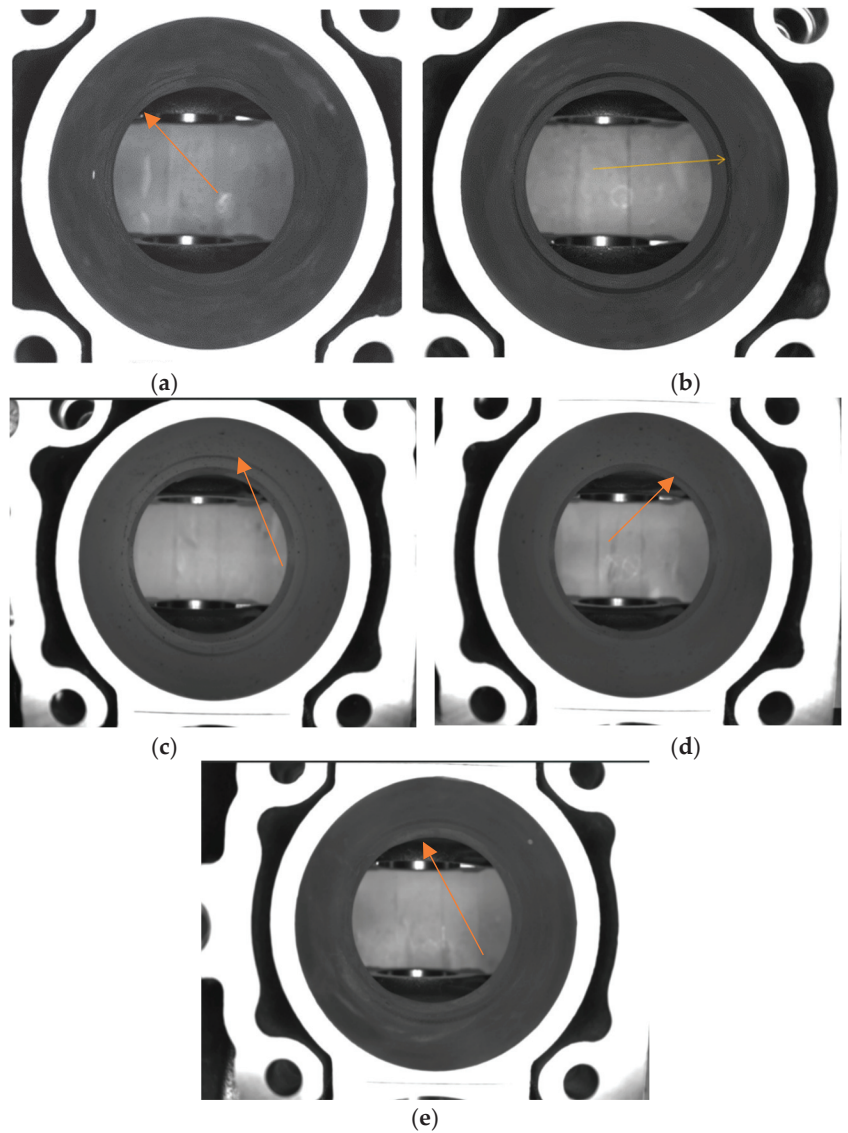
Defects in the cylinder chamber. In (a–e) parts with machining defects can be observed. (a) presents a barely observable defect and (b–e) presents a more prominent one.
